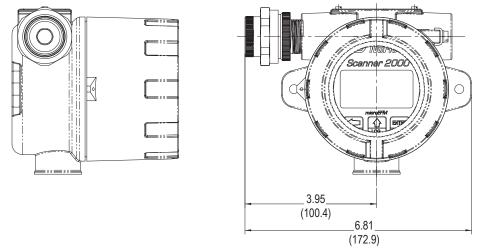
Dimensions of explosion-proof communications adapter; inches (mm)
